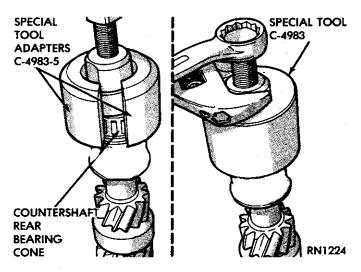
Removing Countershaft Gear Rear Bearing Cone
